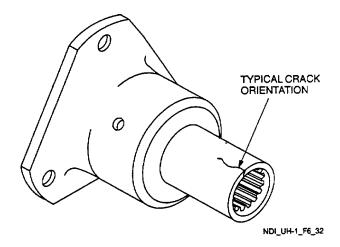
Tail Rotor Control Tube and Quill - Housing.
